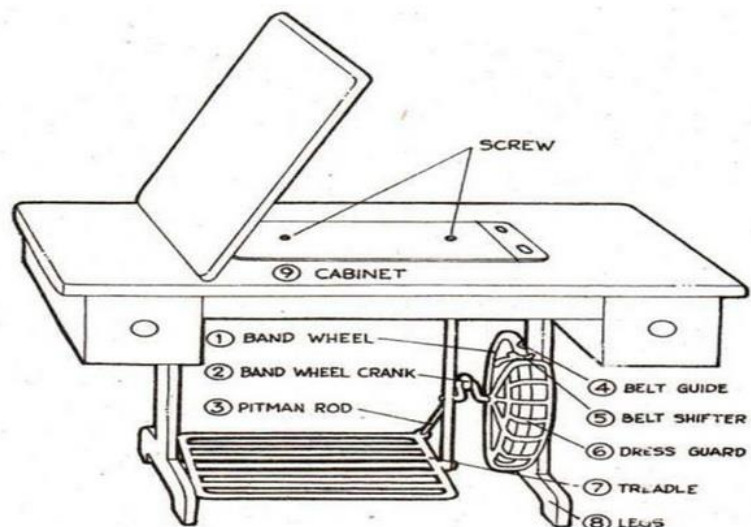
Different Parts of Sewing m/c (Lower Part)
